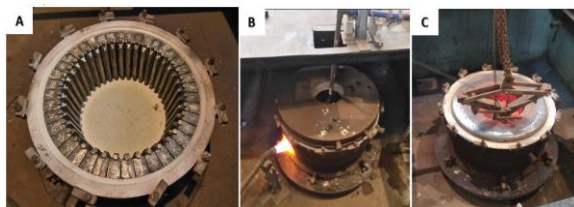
A) Assembly of Ceramic Metal Matrix Inserts in Die, B) Preheating of Die, C) Roll Removal after Pouring
